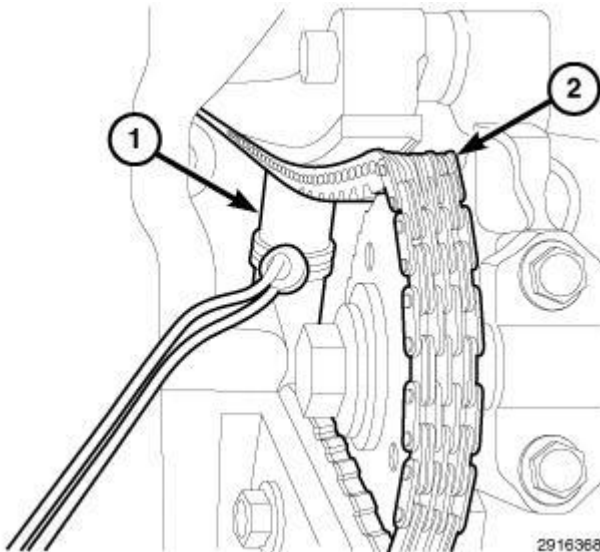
Positioning Locking Wedge Between Timing Chain Strands
